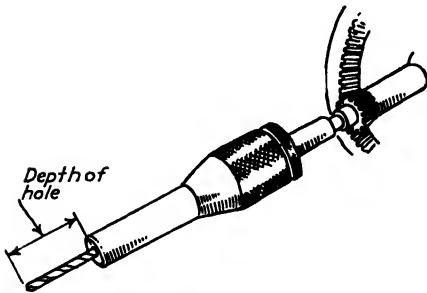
A convenient depth gage can be made by cutting a piece of wood to the correct length, drilling a hole through it, and slipping it over the bit. (Stanley Tools)
